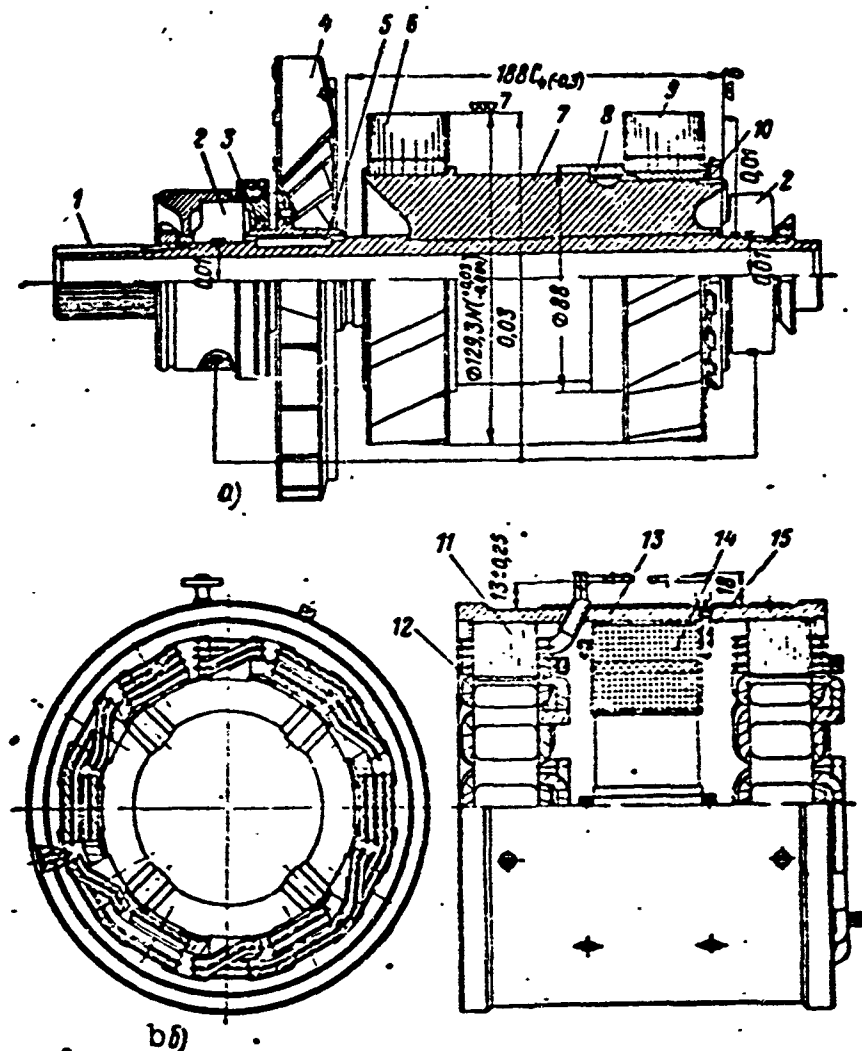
Construction of 30 kva 1200 cps 12,000 rpm double-unit homopolar single-phase aircraft induction generator; a) rotor; b) stator. 1) Shaft; 2) bearing; 3) packing; 4) fan; 5) key; 6) laminated rotor unit; 7) armco rotor sleeve; 8) key; 9) removable rotor unit; 10) nut; 11) laminated stator unit; 12) armature winding; 13) armco stator frame; 14) multilayer field winding; 15) field-winding frame mounting.
